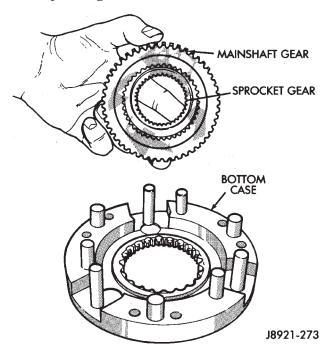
Removing Mainshaft And Sprocket Gears CLEANING AND INSPECTION
